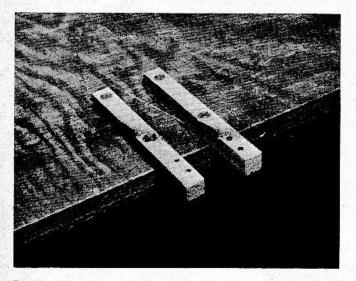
The usual method of mounting is by means of two hardwood bearers. For initial testing they may be screwed to a bench.
